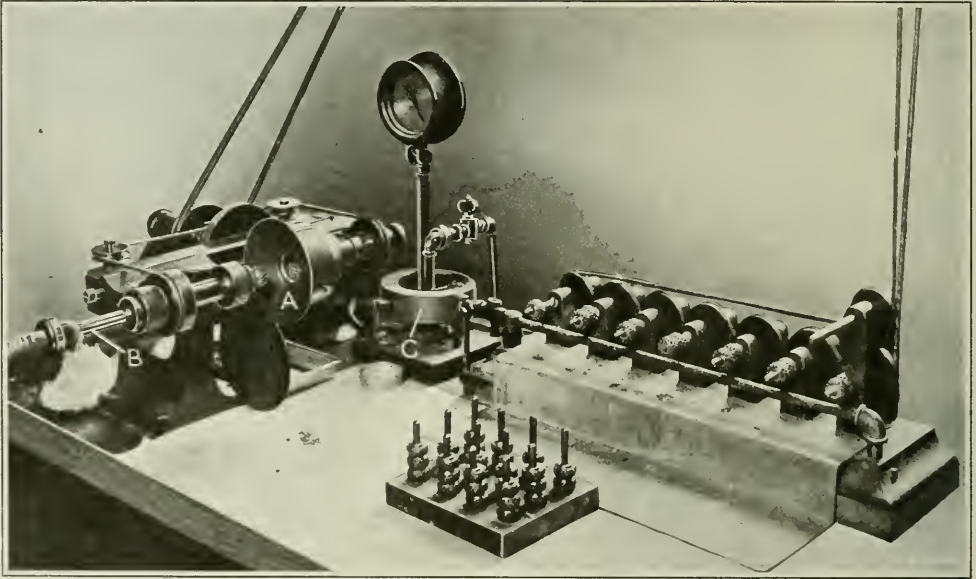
Equipment used for loading Steel Balls with Watch Screws preparatory to grinding and polishing the Heads
